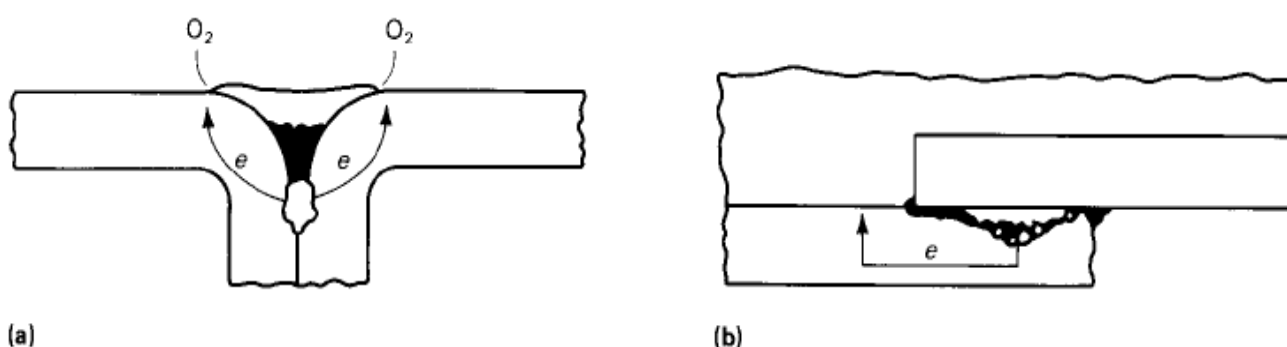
Schematics showing the mechanism of crevice corrosion at a joint. Crevice corrosion is common at weldments or sheet metal joints (a) and rough surfaces where electrolyte can be trapped, and it can occur at tightly sealed lap joints, as in (b). Source: Ref 2
